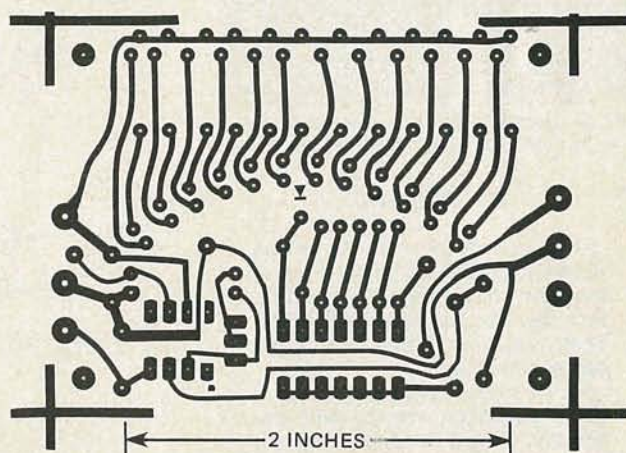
PC PATTERN for the front board. The LED indicators are arranged so they protrude through holes in an arc in the meter dial.
